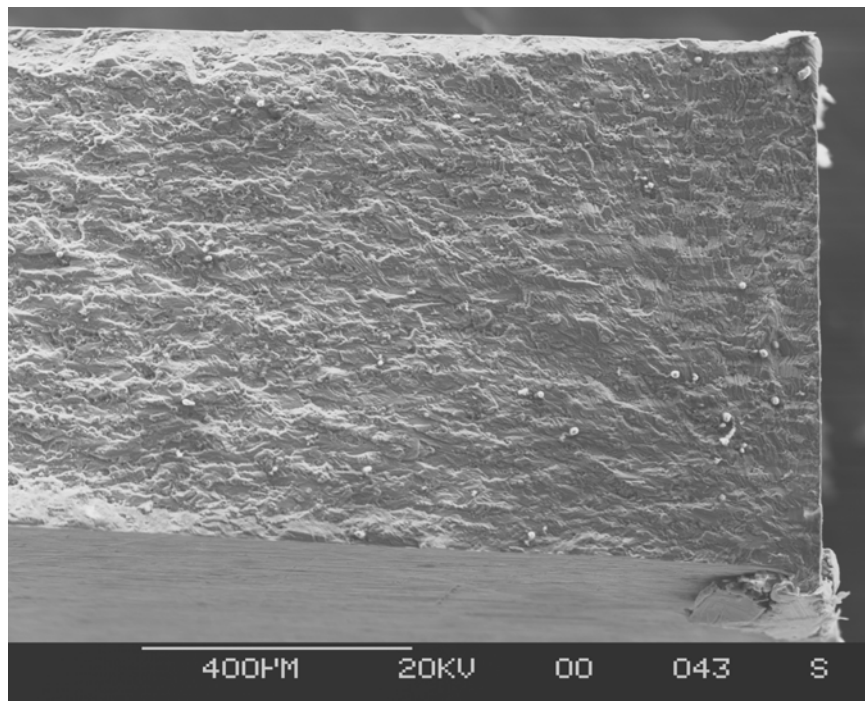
Fatigue Crack on Fracture Surface of Specimen 5932.
